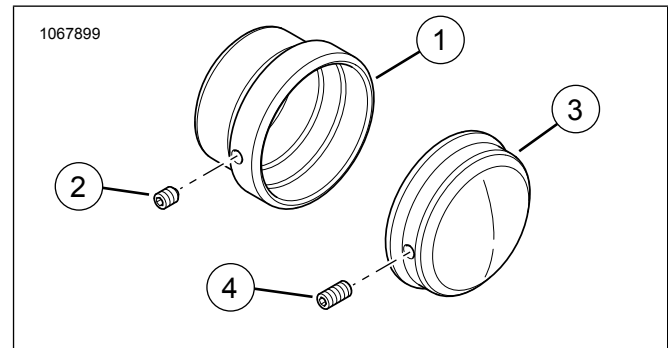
Service Parts: Brass Rear Axle Cover Kit
